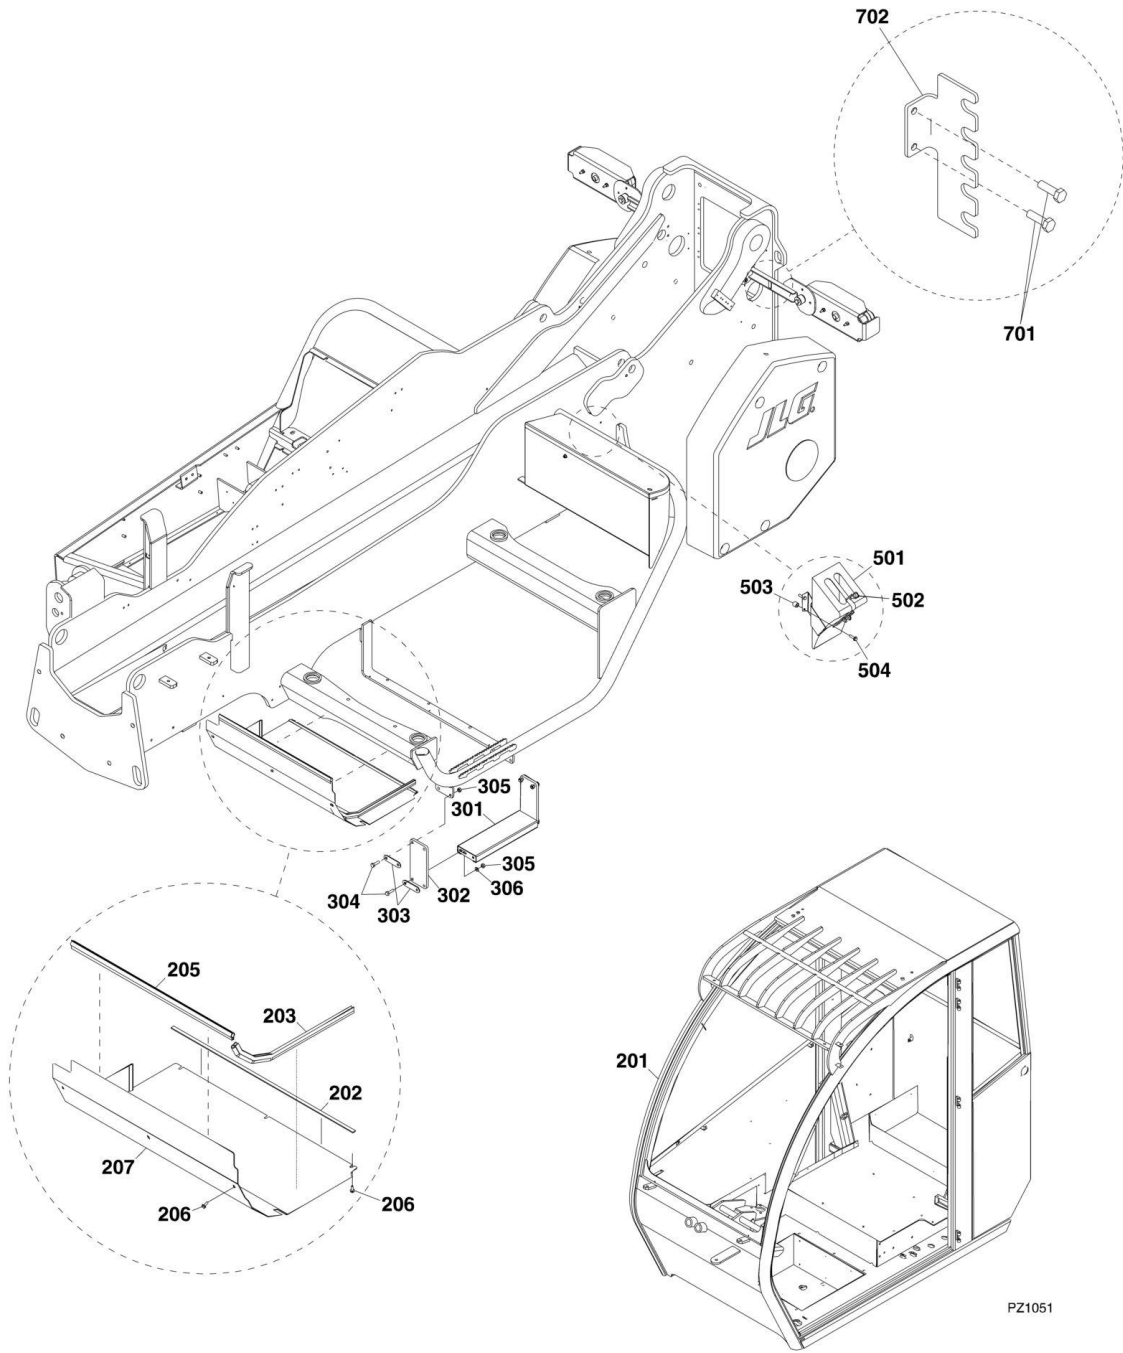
FRAME SHROUDING AND ATTACHING PARTS, LEFT SIDE
